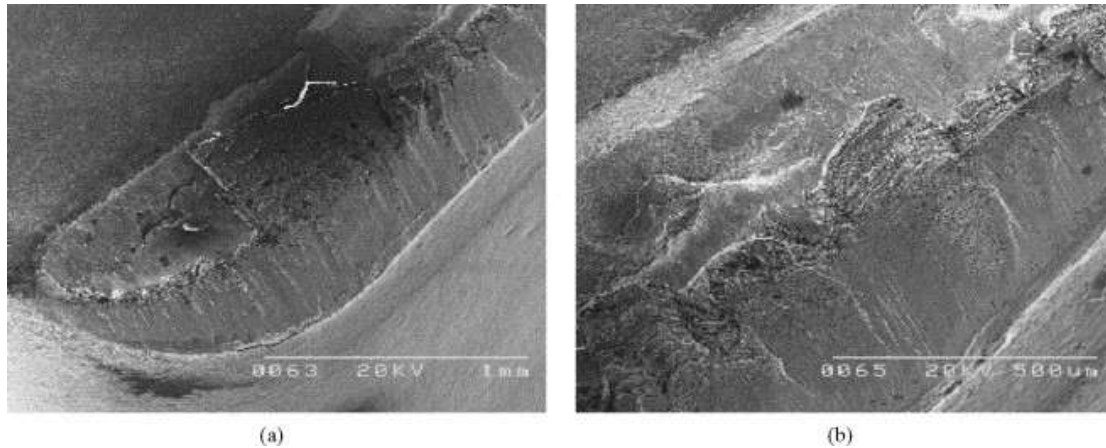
(a) Worn tool after machining Inconel 718 with 203 bar coolant pressure at a speed of 20 m/min and a feed rate of 0.3 mm/rev. (b) Enlarged view on the flank face showing abrasive wear and coating de-lamination of coated carbide tool
